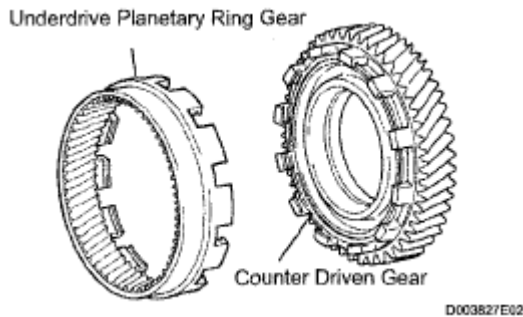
Identifying Underdrive Planetary Ring Gear And Counter Driven Gear
